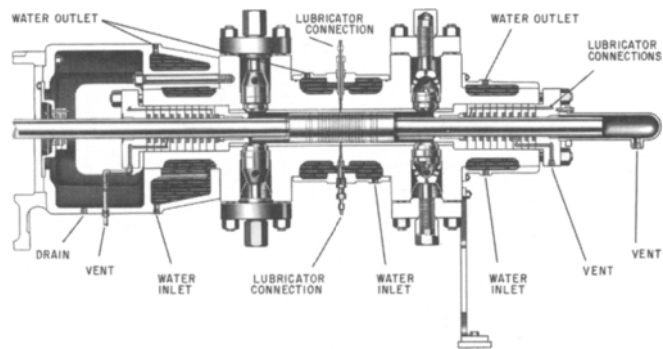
L. Typical forged steel cylinder with tail-rod. (Used by permission: Ingersoll-Rand Company.)
